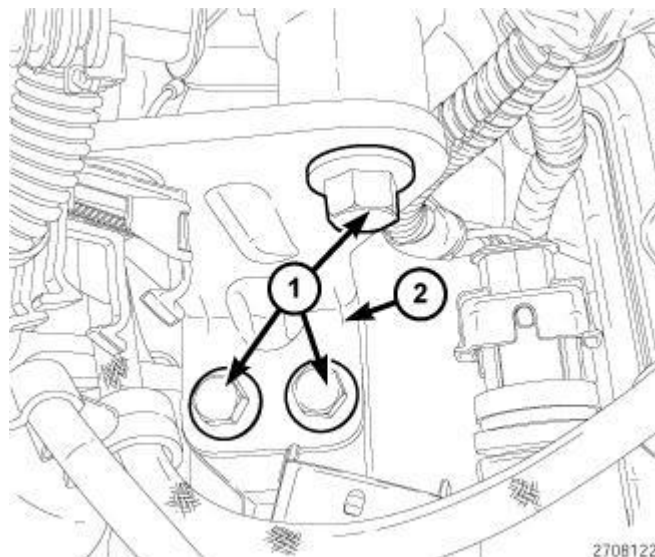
GENERATOR BRACKET SUPPORT & BOLTS
